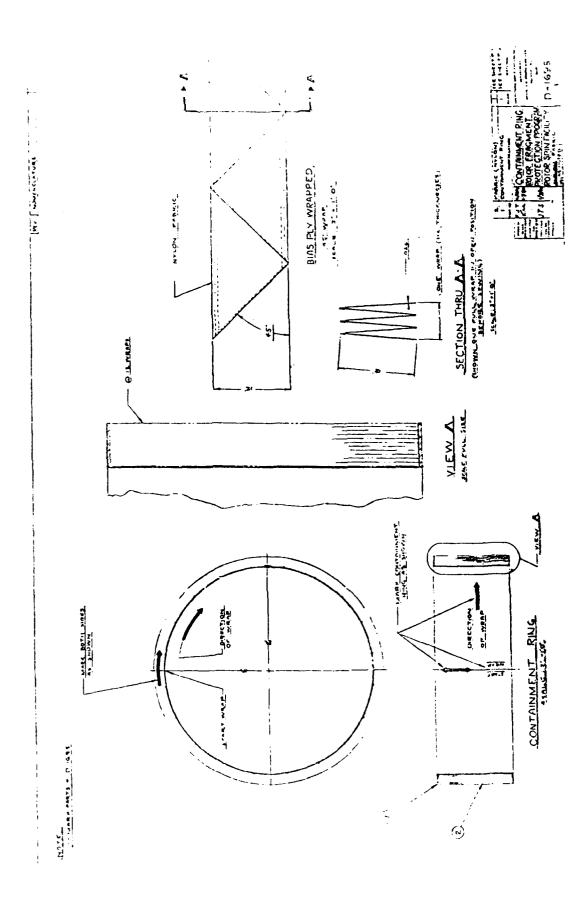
NYLON CONTAINMENT RING MANUFACTURING DRAWING (1 OF 3)
